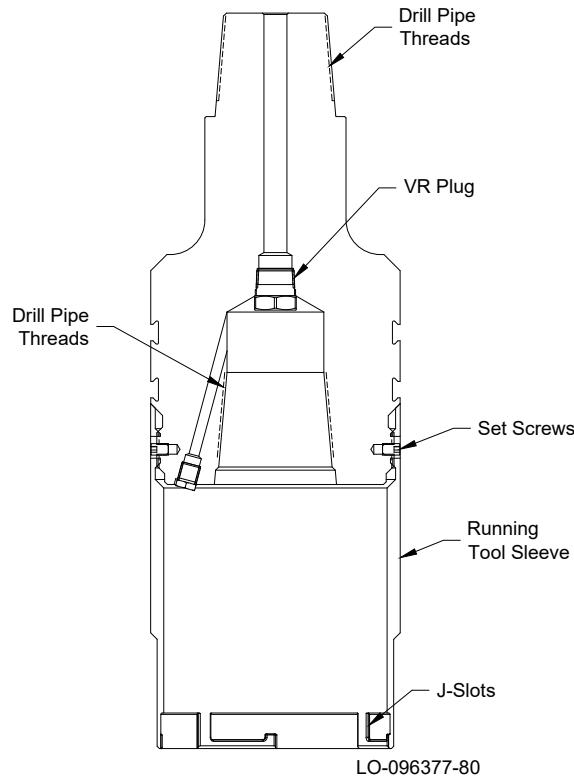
Combination Tool (Seal Assembly Running Tool Configuration)
